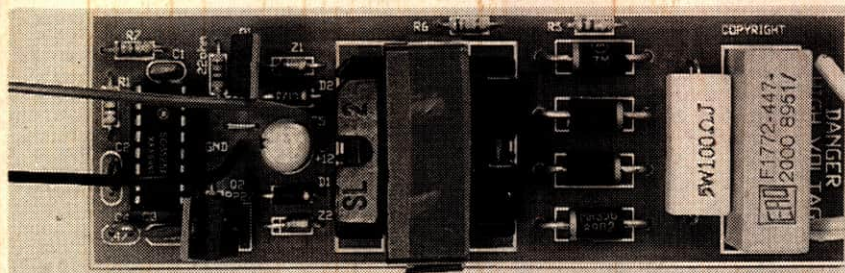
This photo shows a close up of the inverter PCB. The MOSFETs in this board are type MPT50N05E and have a different package to the specified P222 devices. See the layout diagram for details.
